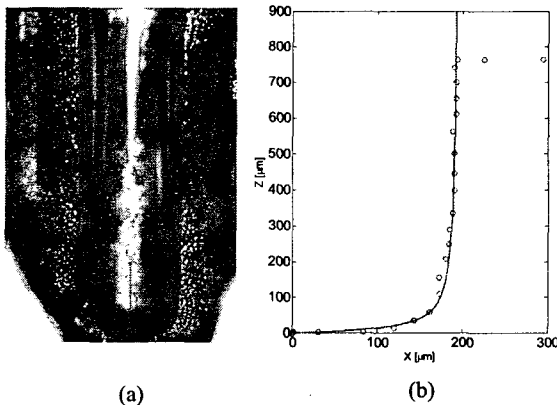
Cross-sectional geometry of micro-EDM drilled hole: (a) example of machined hole; (b) curve fitting result
